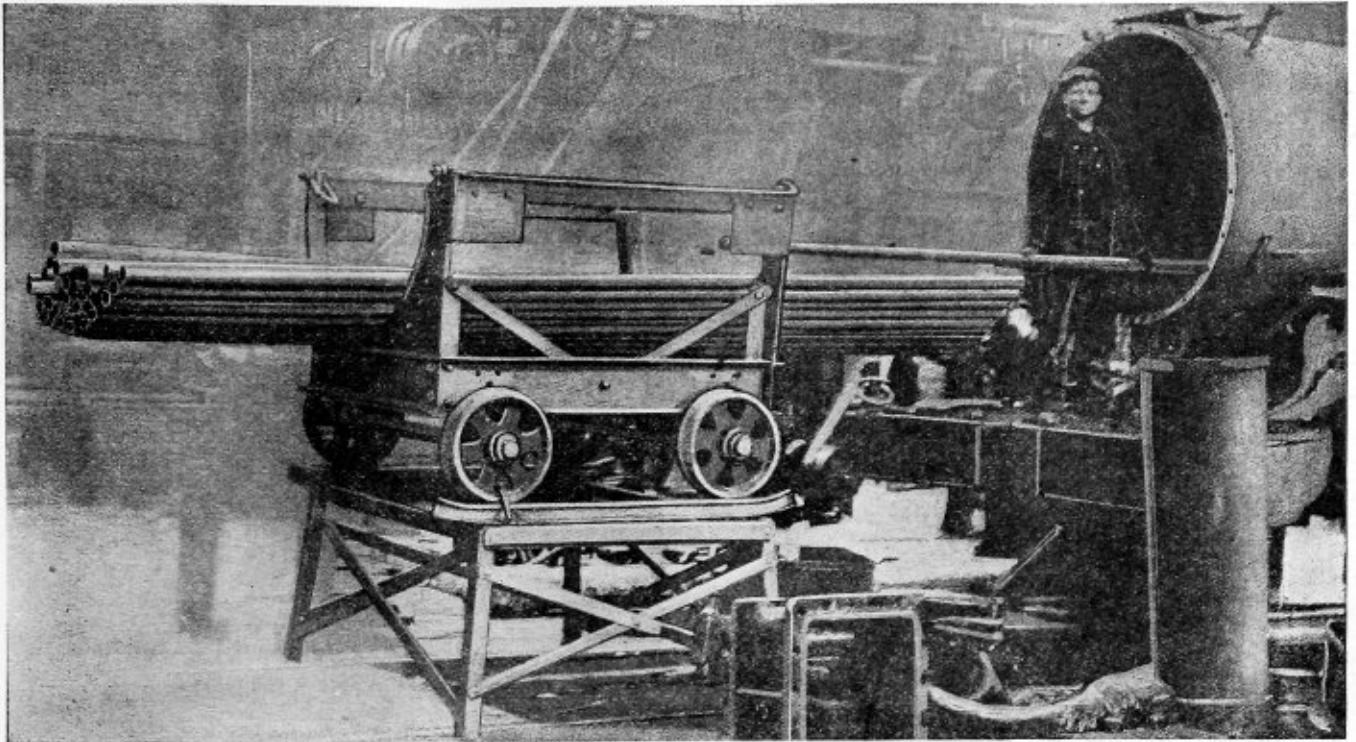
Loading the Tube Truck Which Is Used for Charging the Overhead Framework Type Cleaner
